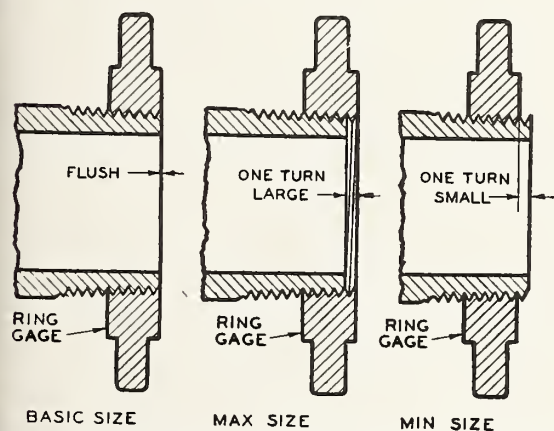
Gaging of external American National taper pipe threads with working gage.
